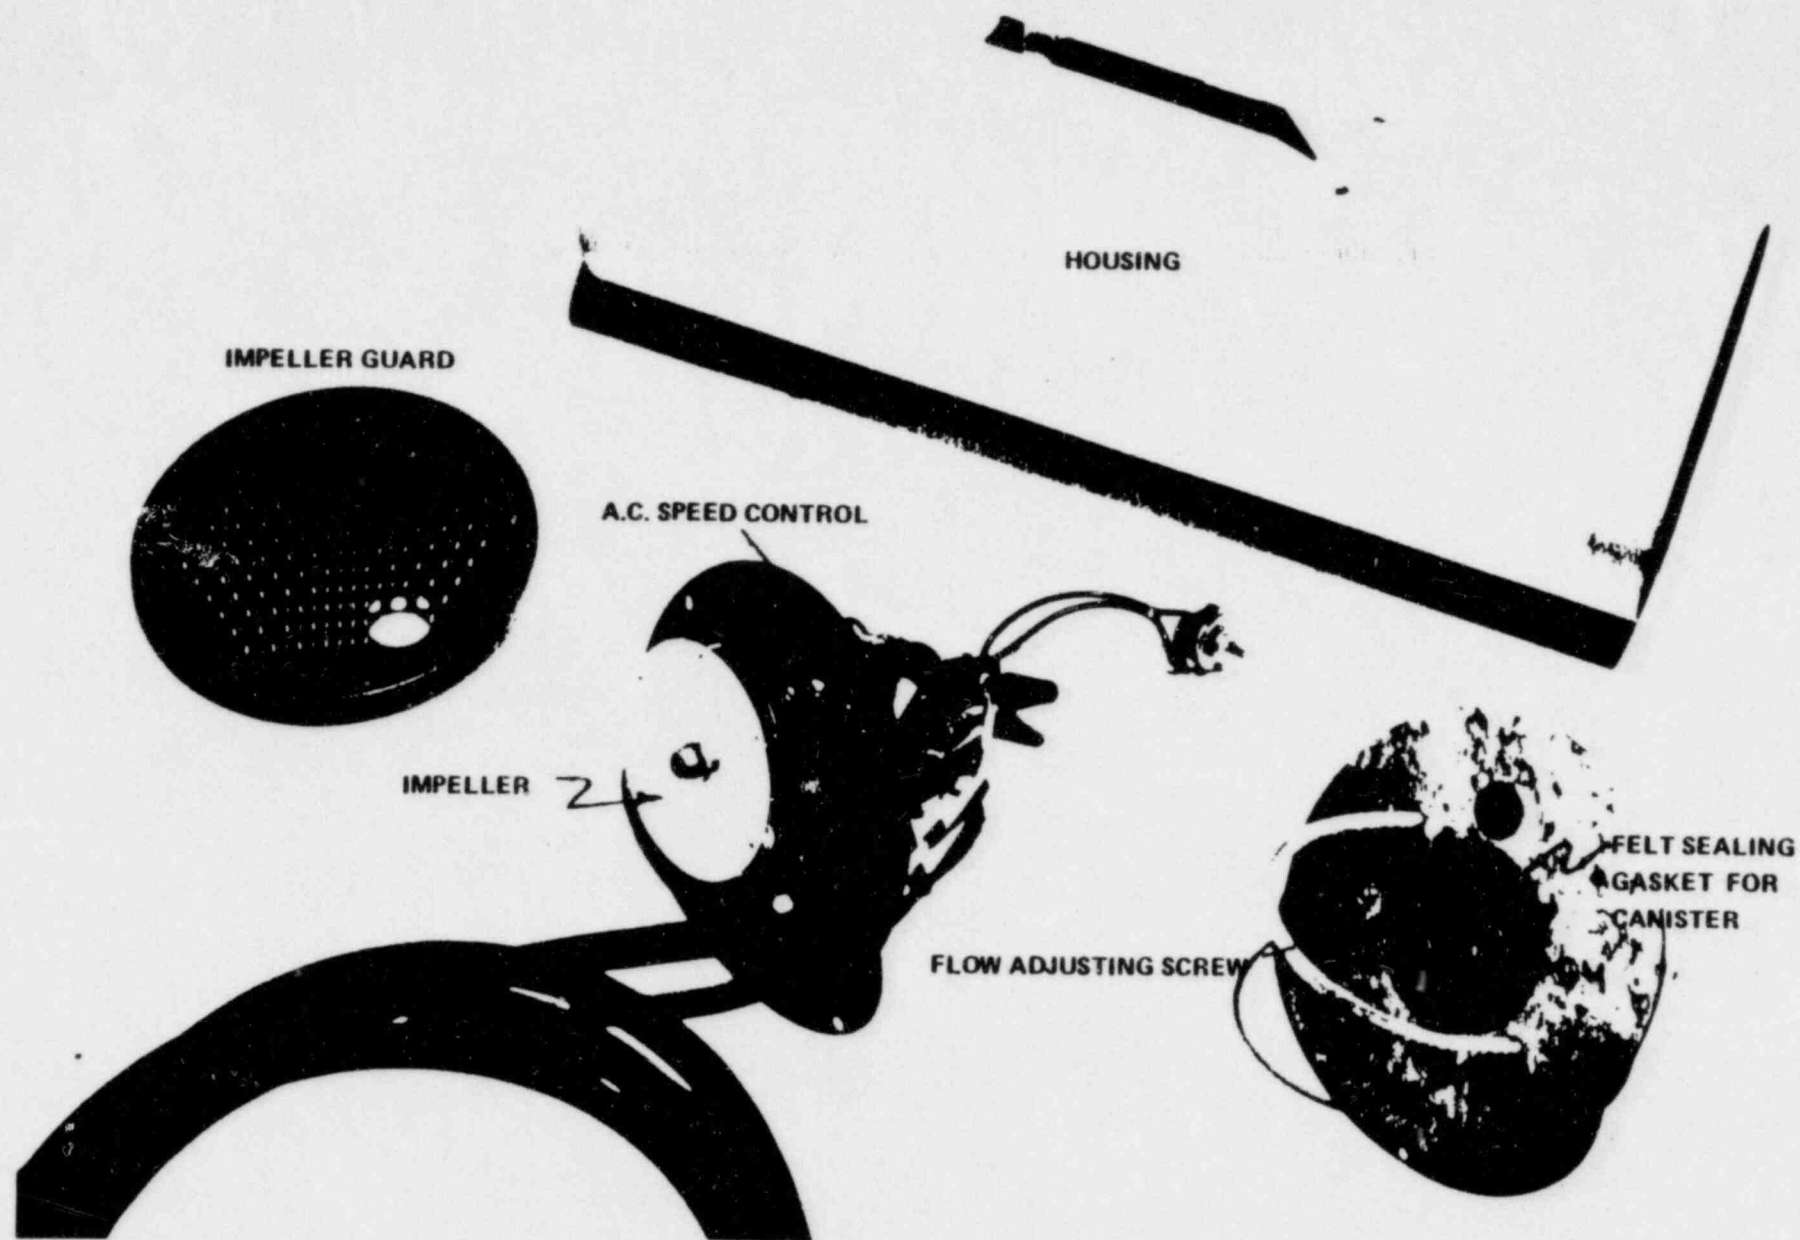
Air mover components: Exterior view of vacuum bulkheads.
